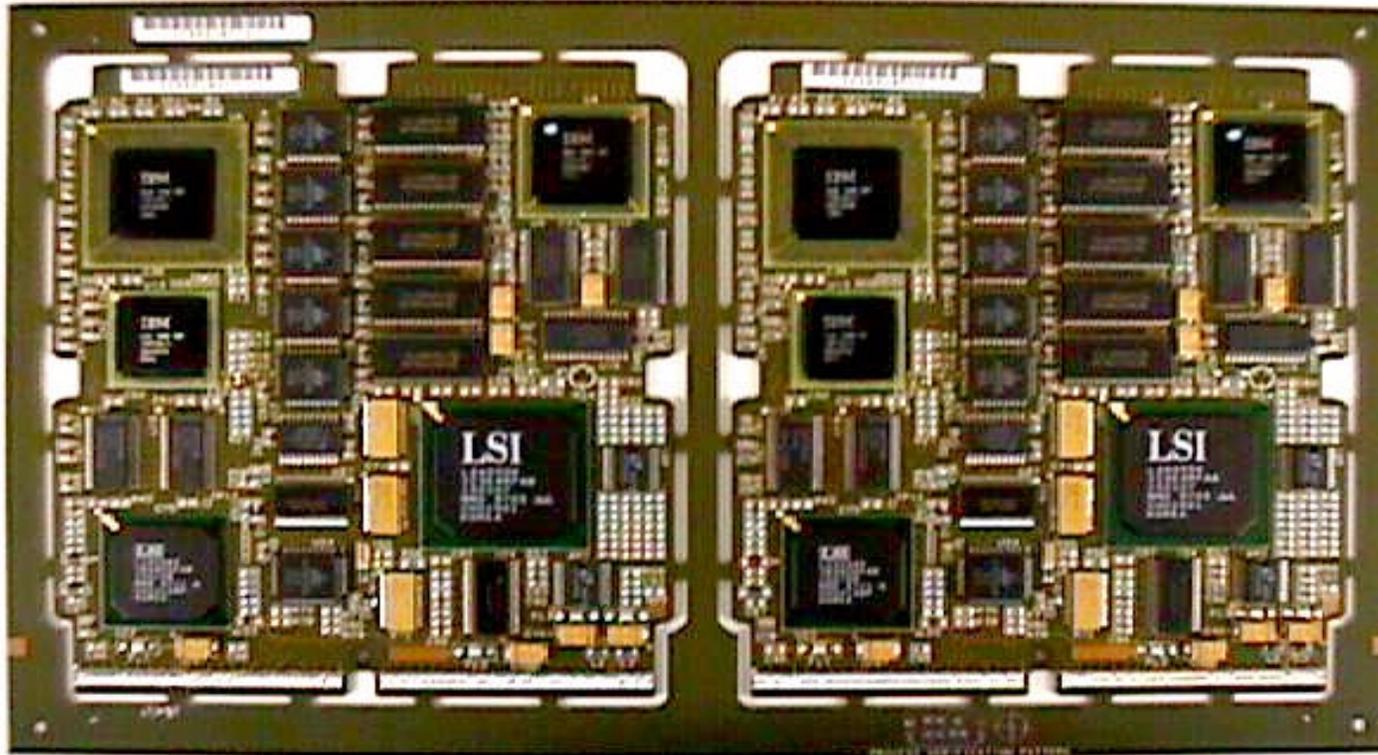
1 Printed Wiring Board Array with Components Assembled
